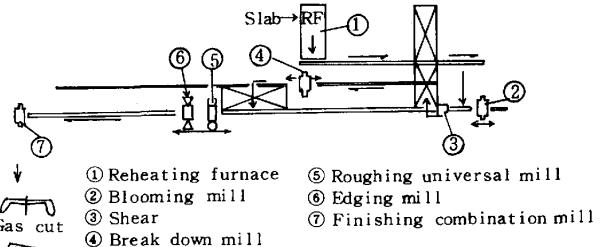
Mill layout of the Hirohata Large Shape Mill
